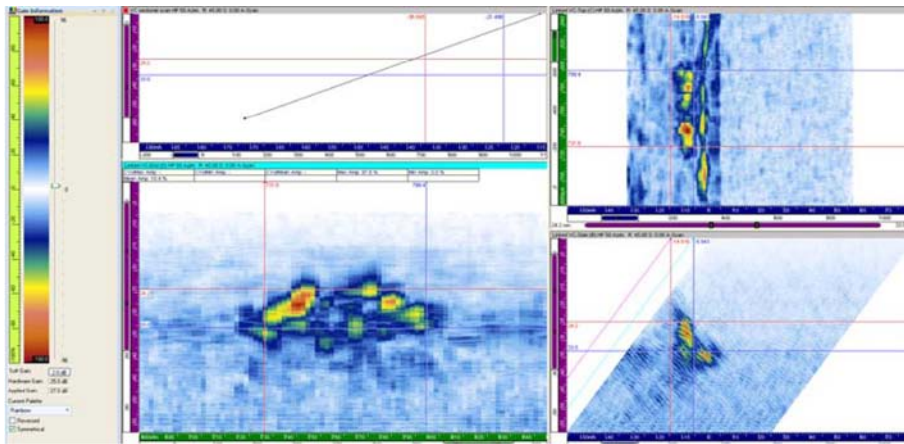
Specimen 9C-034 Flaw 1 After Weld Crown Removal at 1.5 MHz
